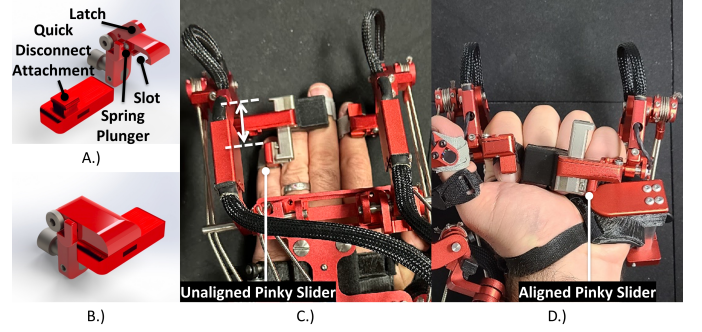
Finger attachments. A.) Exploded view of the quick disconnect mechanism. B.) Assembled view. C.) Posterior view of the 1-1-3 finger attachments with pinky slider unaligned. Arrows indicate the range of motion of the pinky slider. D.) Anterior view with pinky slider aligned.
